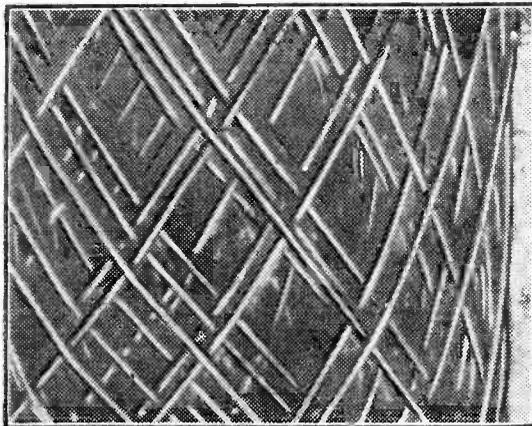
An enlarged view of the wave-winding produced on the machine.
